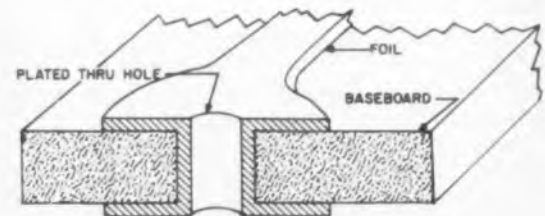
Process B—Conductive pattern of photoetched board is gold-plated; plated-thru hole is used.
